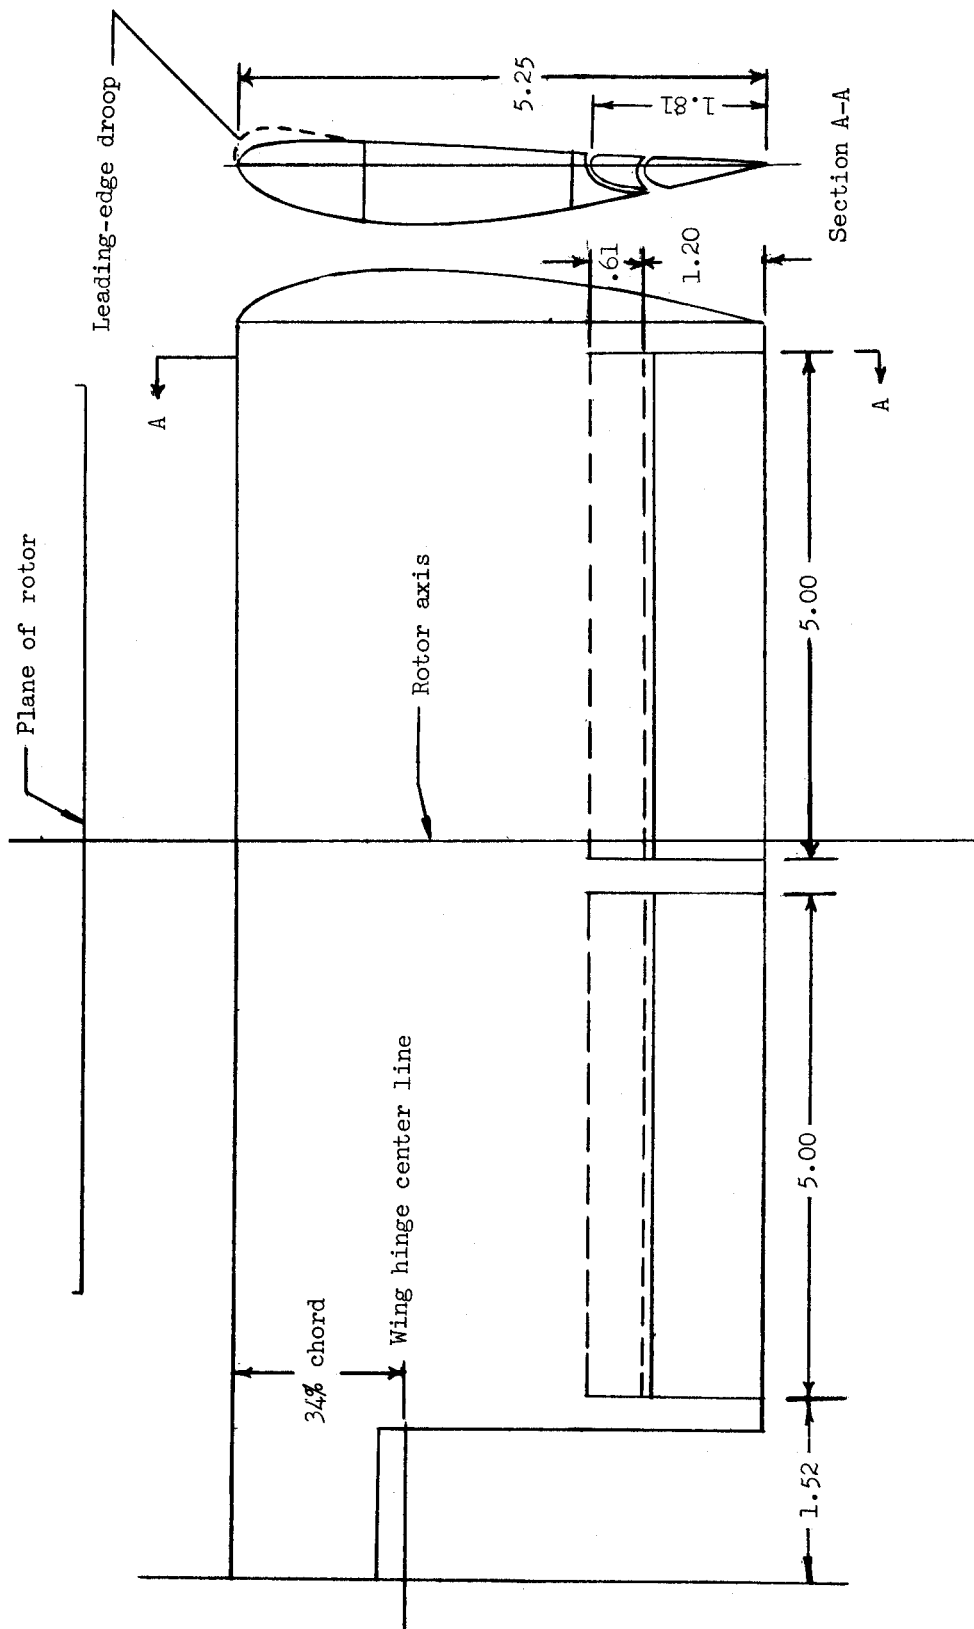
Detail sketch of wing with full-span flap. (All dimensions are in feet.)
